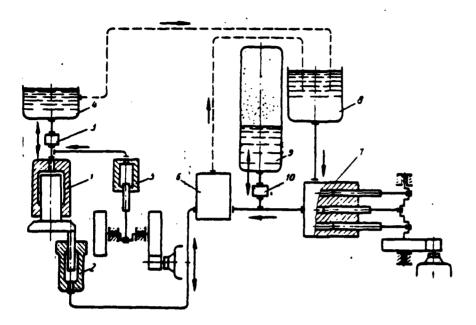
The schematic diagram of press with the drive from the mechanical multiplier: 1 - working cylinder; 2 - cylinder of recurrent course; 3 - filler valve; 4 - filler tank; - 5 - multiplier with the power drive; 6 - controls; 7 - pump; 8 - pumping tank; 9 - storage battery/accumulator of high-pressure liquid; 10 - check valve.
